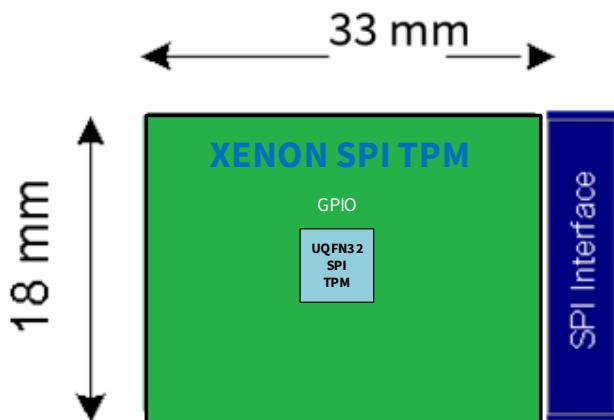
Top view of Xenon - SPI TPM board PCB for SPI TPM
